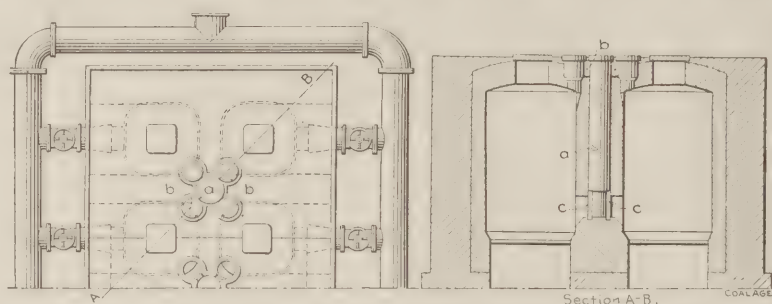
PLAN AND SECTIONAL ELEVATION OF "RING" PRODUCER
